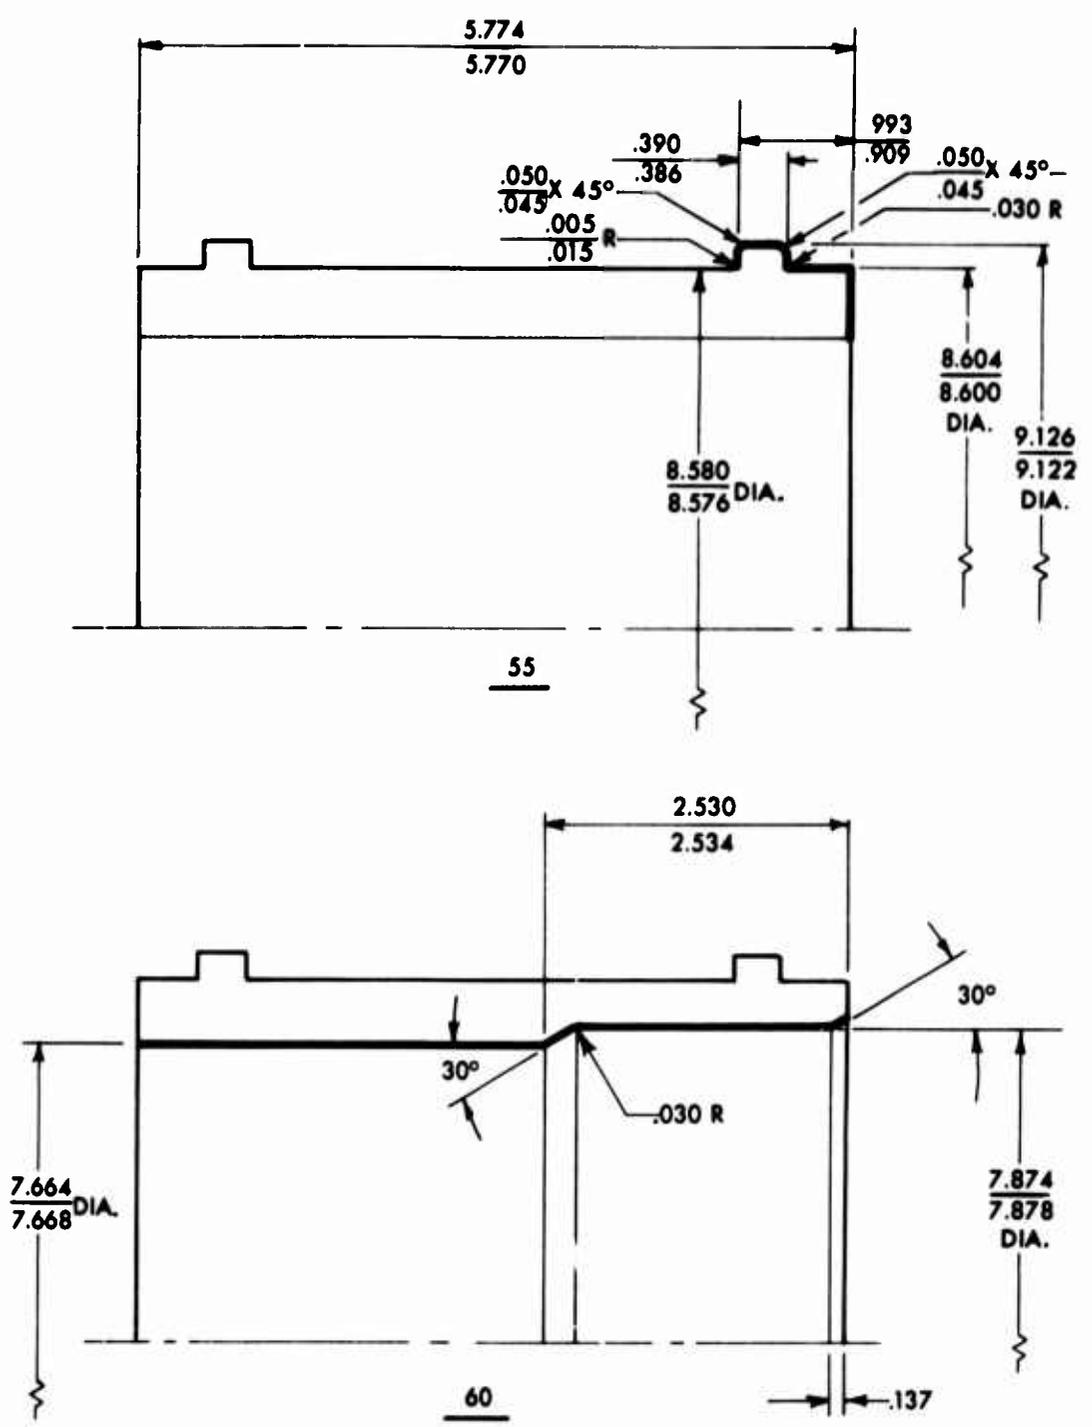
RG351-11183-041, Machine Operation Drawing. (Sheet 2 of 4).
